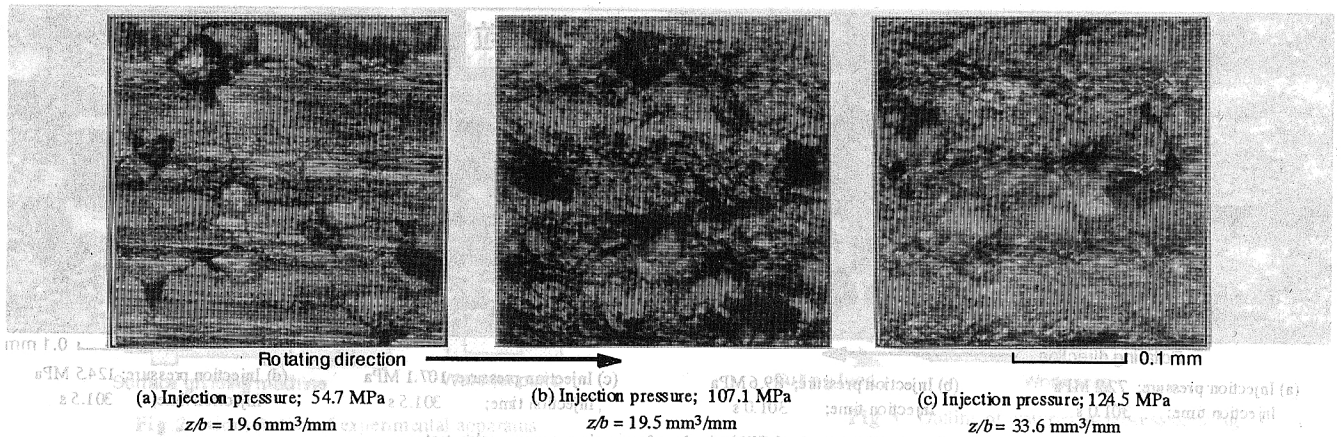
Photograph of CBN wheel surface on in-process dressing test
